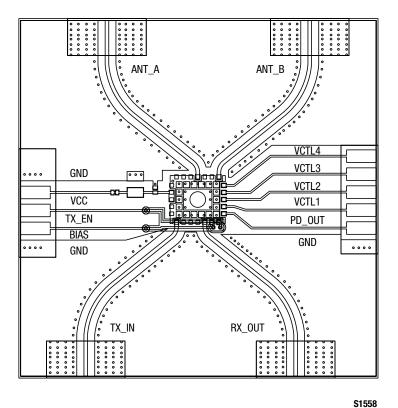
SKY65206-13 Evaluation Board Assembly Drawing
